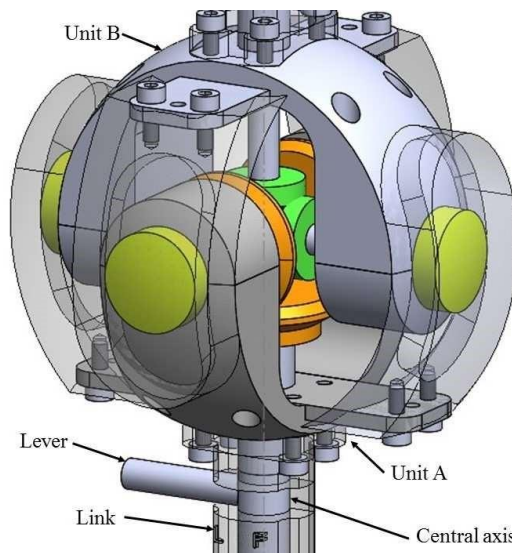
shows the overall view of the proposed retractor. Figure 2 shows an enlarged view of the joints. Each joint (Joint  $n$  ( $n = 1, 2, 3$ )) consists of two identical units (Unit A, Unit B) with a universal joint. These two identical units are composed by combining one unit with the other unit rotated by  $90^\circ$ . A thin central shaft runs through the inside of each link (Link  $n$  ( $n = 1$  to  $4$ )) that connects each joint. Each central shaft installed in each link connects by a universal joint installed in each joint. Therefore, all the central shafts in each link and the universal joints
